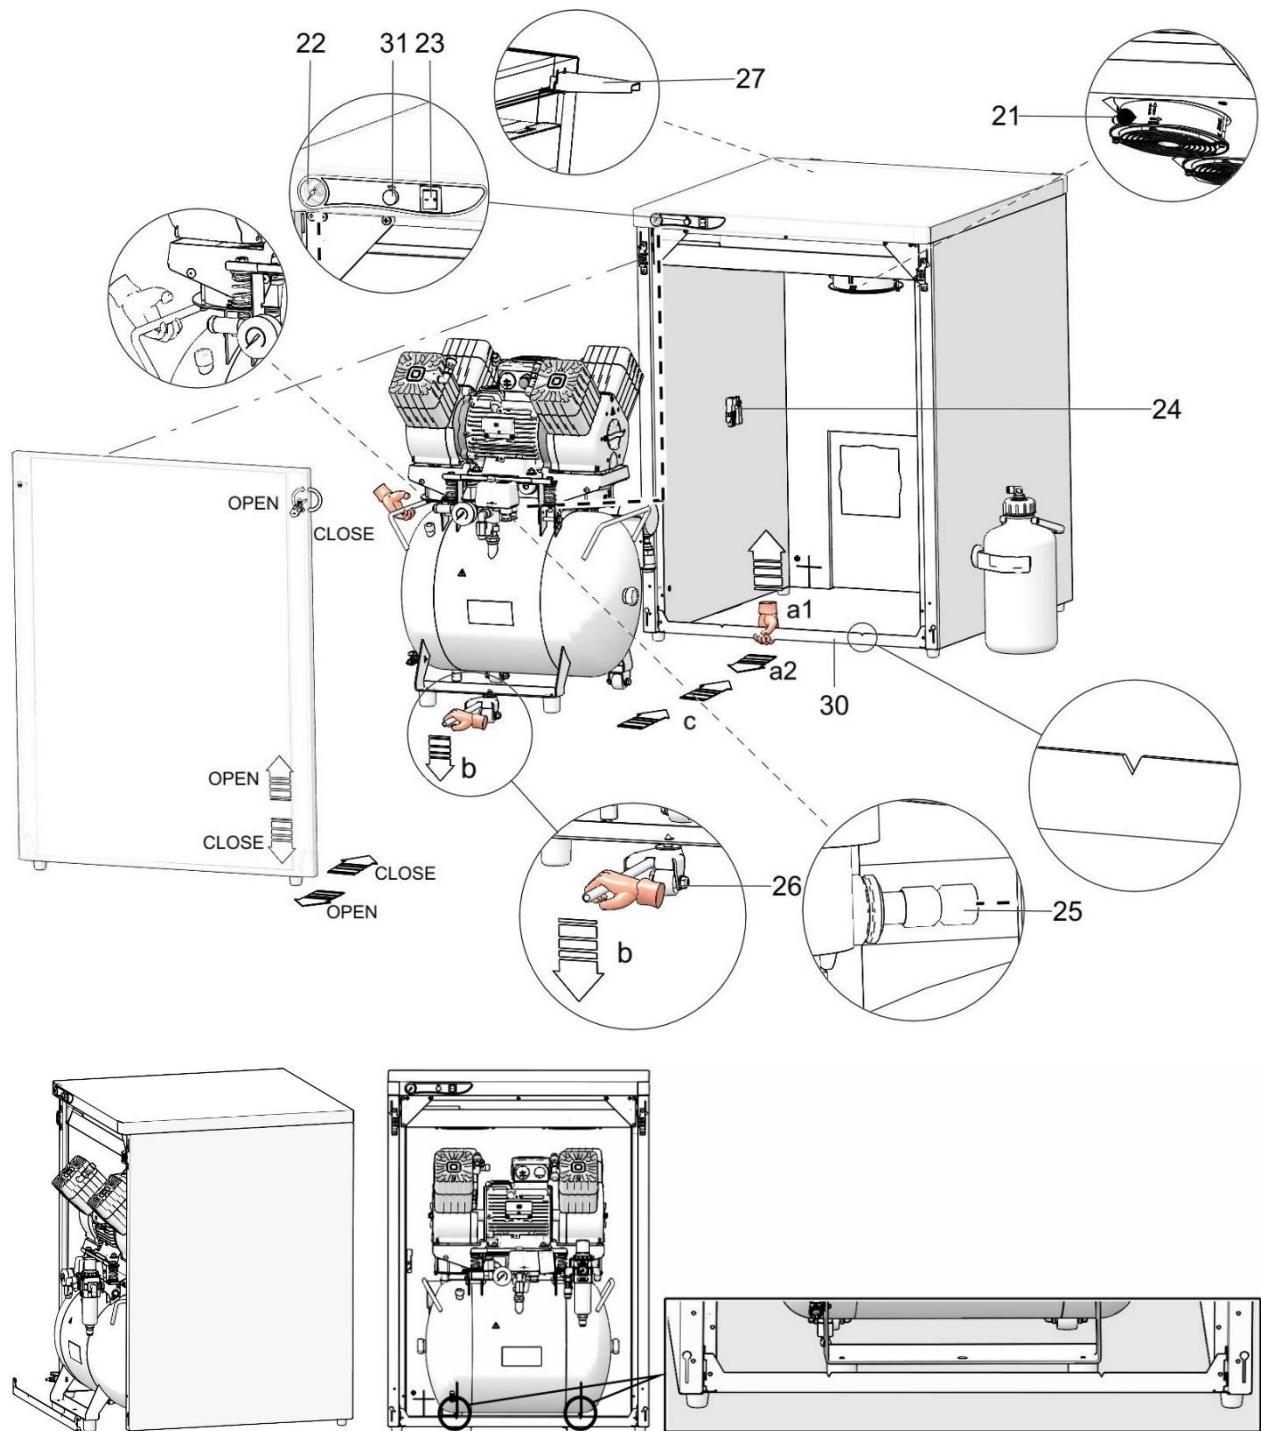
Compressor with membrane dryerDK50 4VR/50/M
